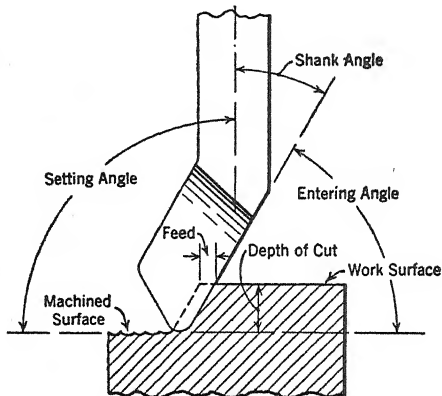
Right-Cut, Left-Bent-Shank Tool. Symbol RC(LB).
